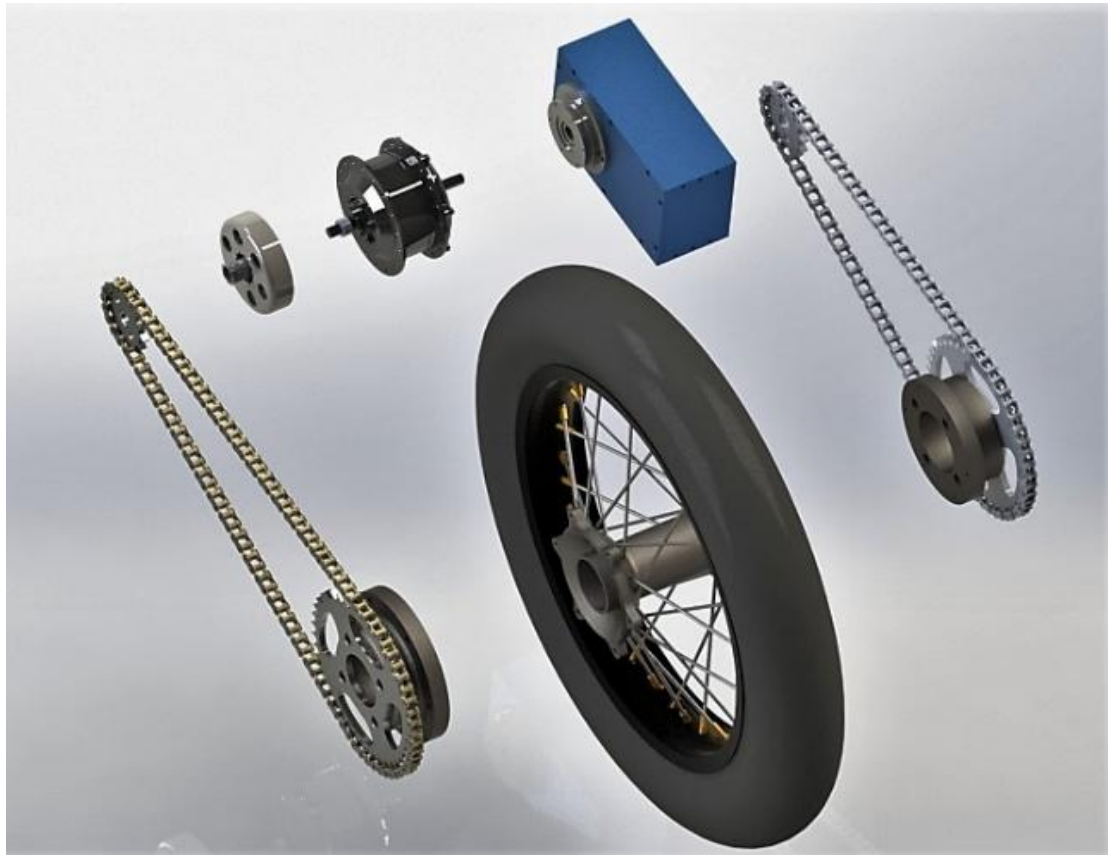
EXPLODED VIEW OF ENTIRE ASSEMBLY
